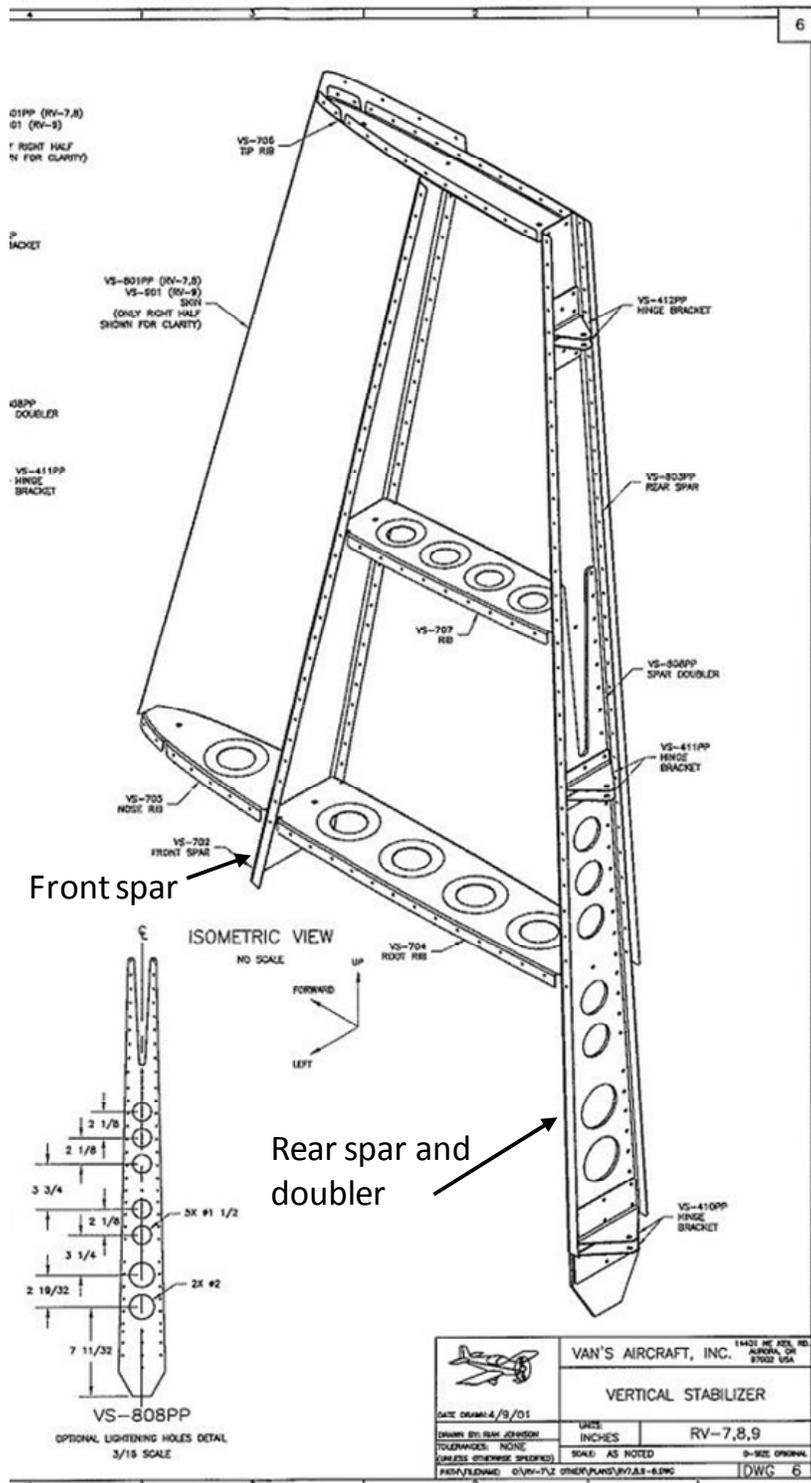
Portion of the assembly drawing for the vertical stabilizer showing the front and rear spars and the rear doubler.
